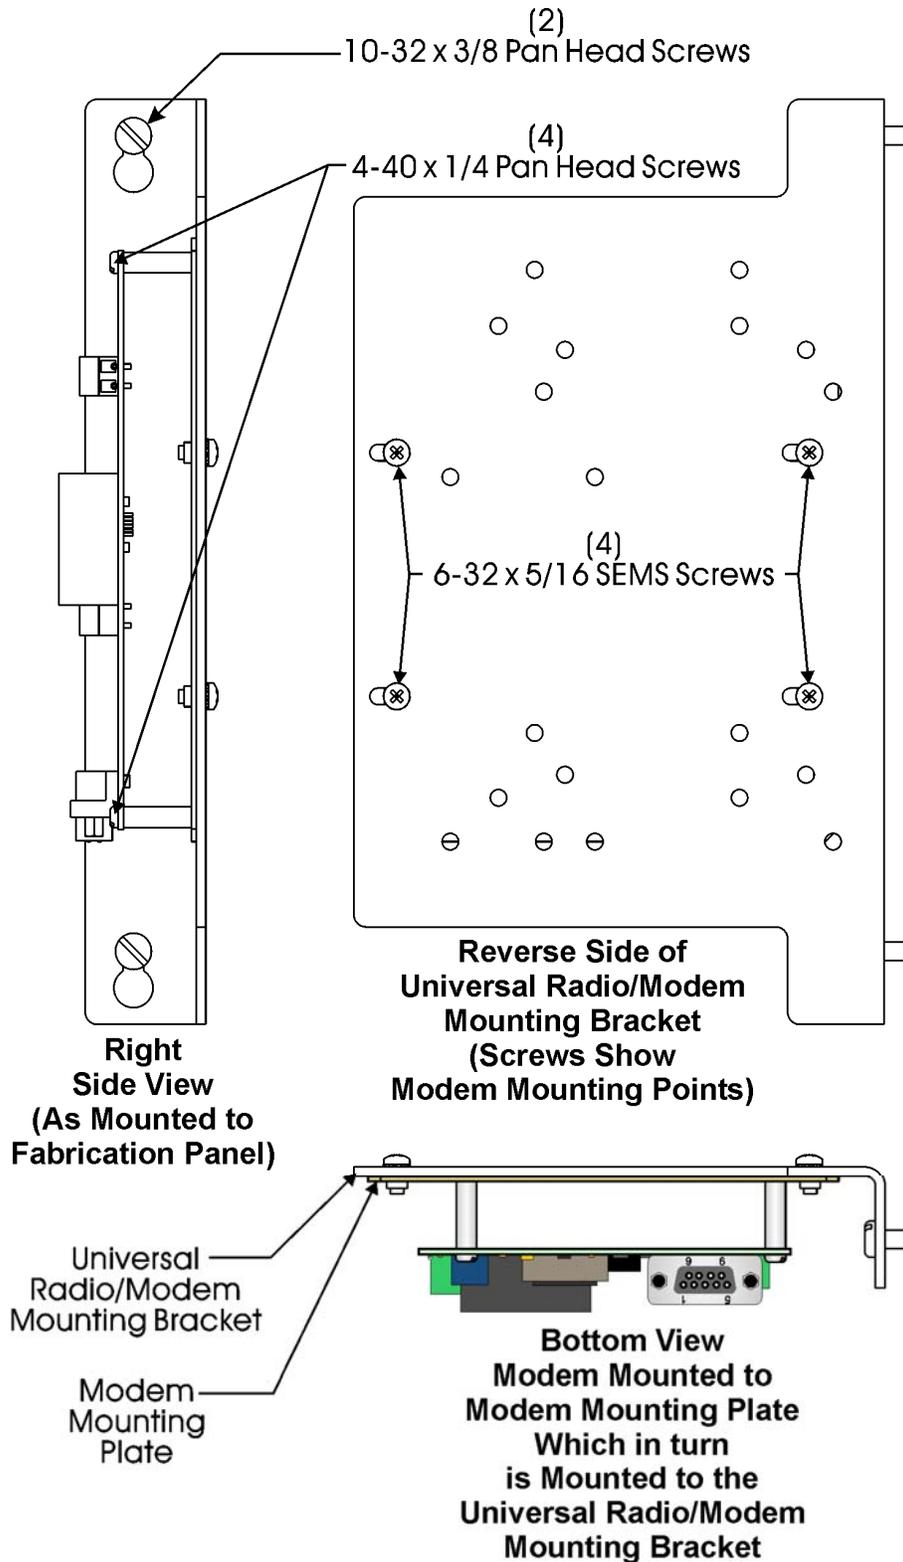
Modem Installation Diagram (GFC Plus) - Modem mounted to Modem Mounting Plate, Modem Mounting Plate mounted to Universal Radio/Modem Mounting Bracket which in turn is mounted to the Fabrication Panel
